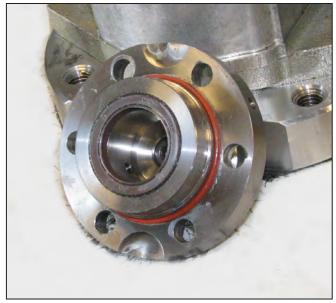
Inspect and grease the O-ring seal on the thrust housing cap.
